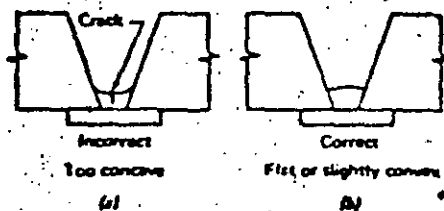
A concave root pass (a) may crack because tensile stresses exceed the strength of the weld metal. A slightly convex root pass (b) helps prevent cracking.
